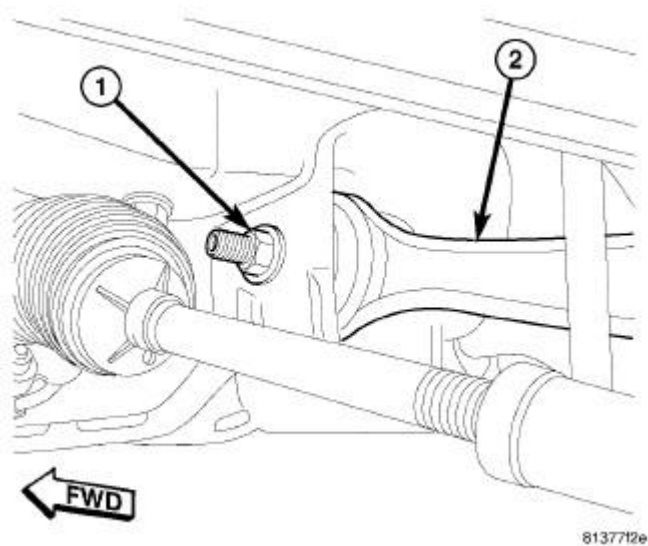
CONTROL ARM CRADLE BOLT NUT
